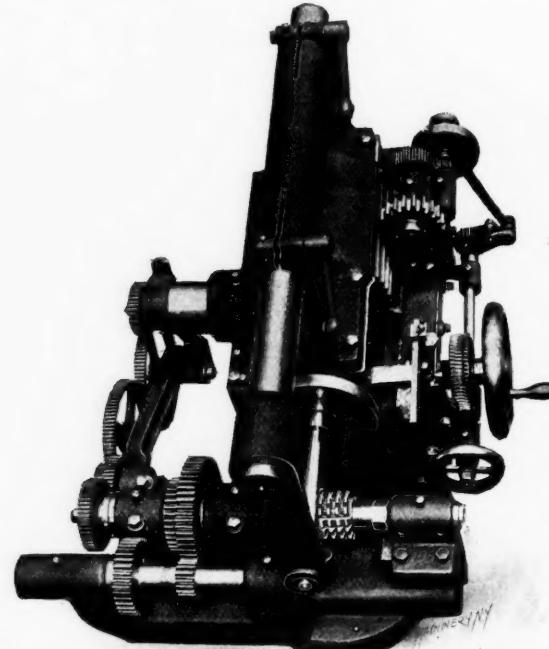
Top View, showing Back-geared Spindle Drive, Automatic Feed, etc.
